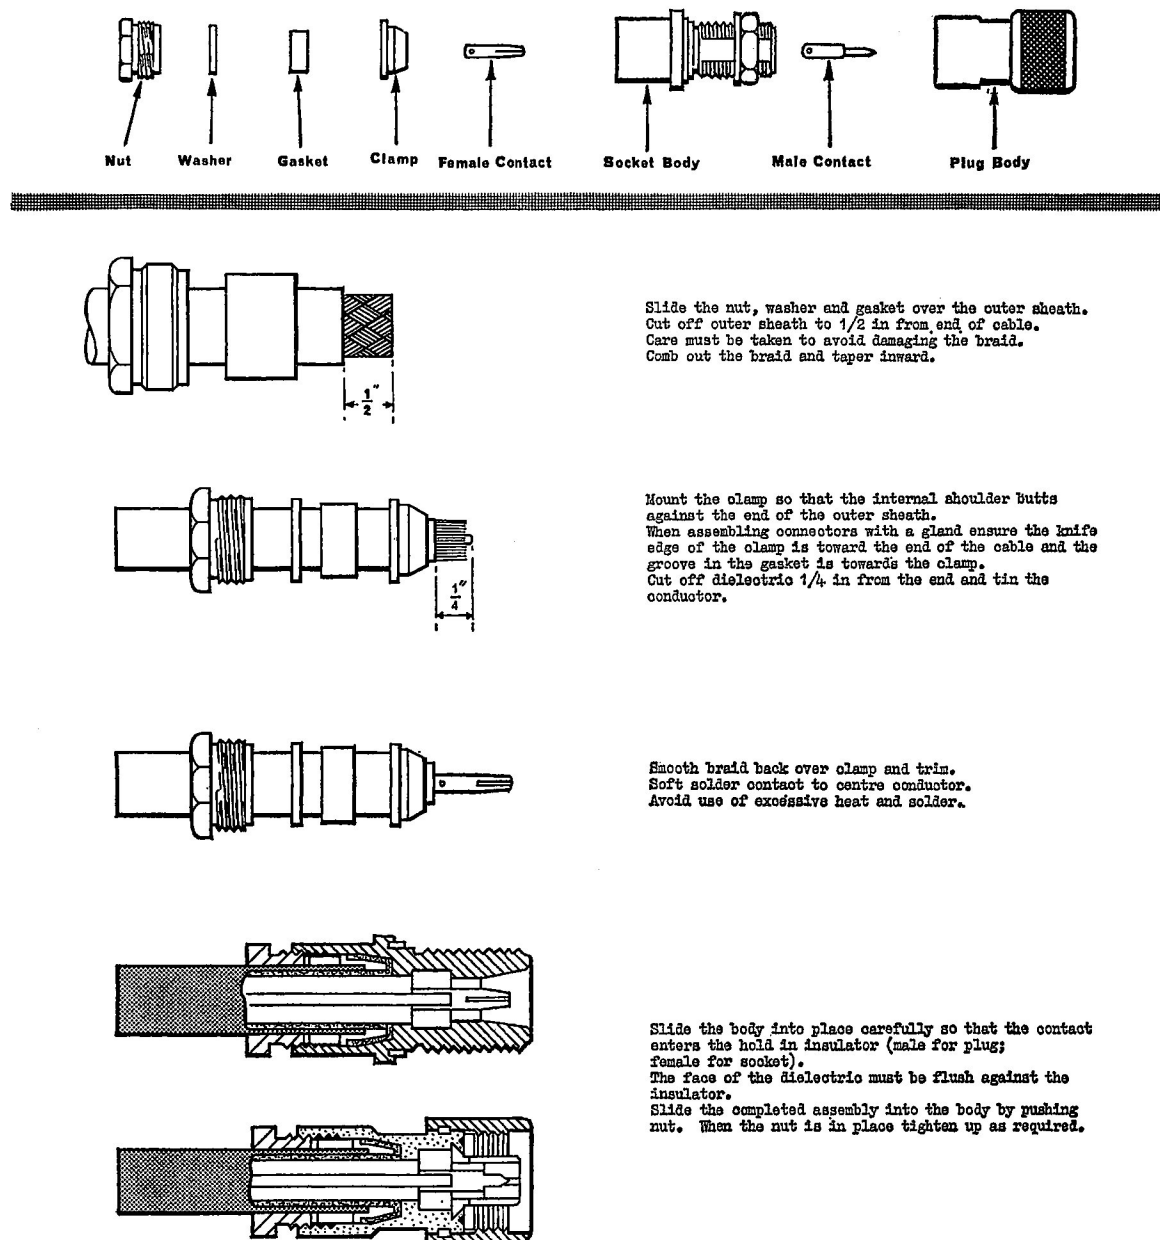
A—Assembly instructions—N Type plugs and sockets—General
